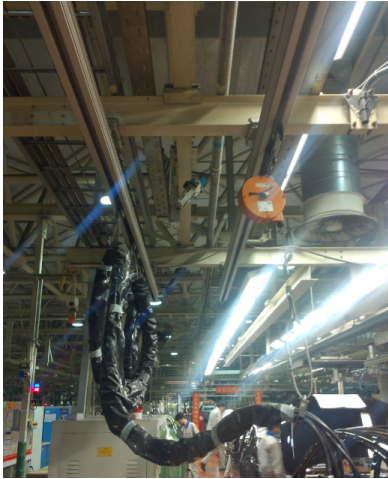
track system incl. balancing device and hose package 悬挂系统包括平衡器及管束
